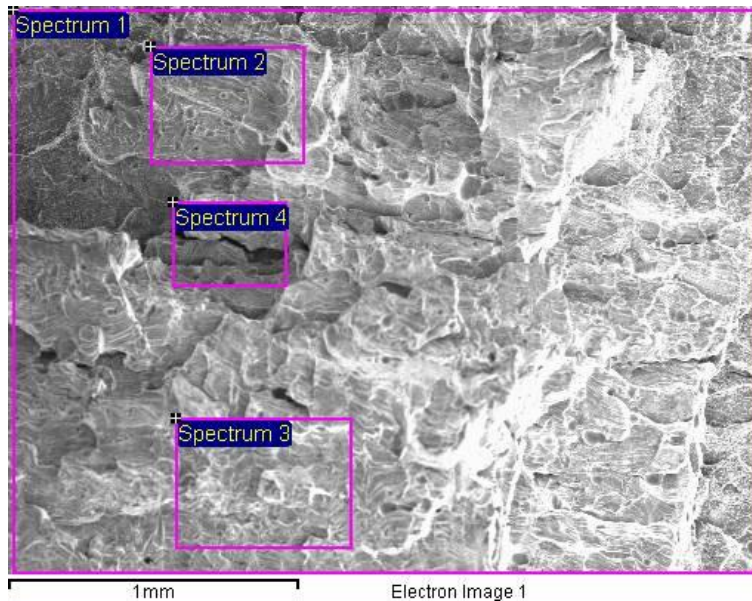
Fracture surface of AA6061 sample 19 from test A5, produced with 25 μm layer thickness.
